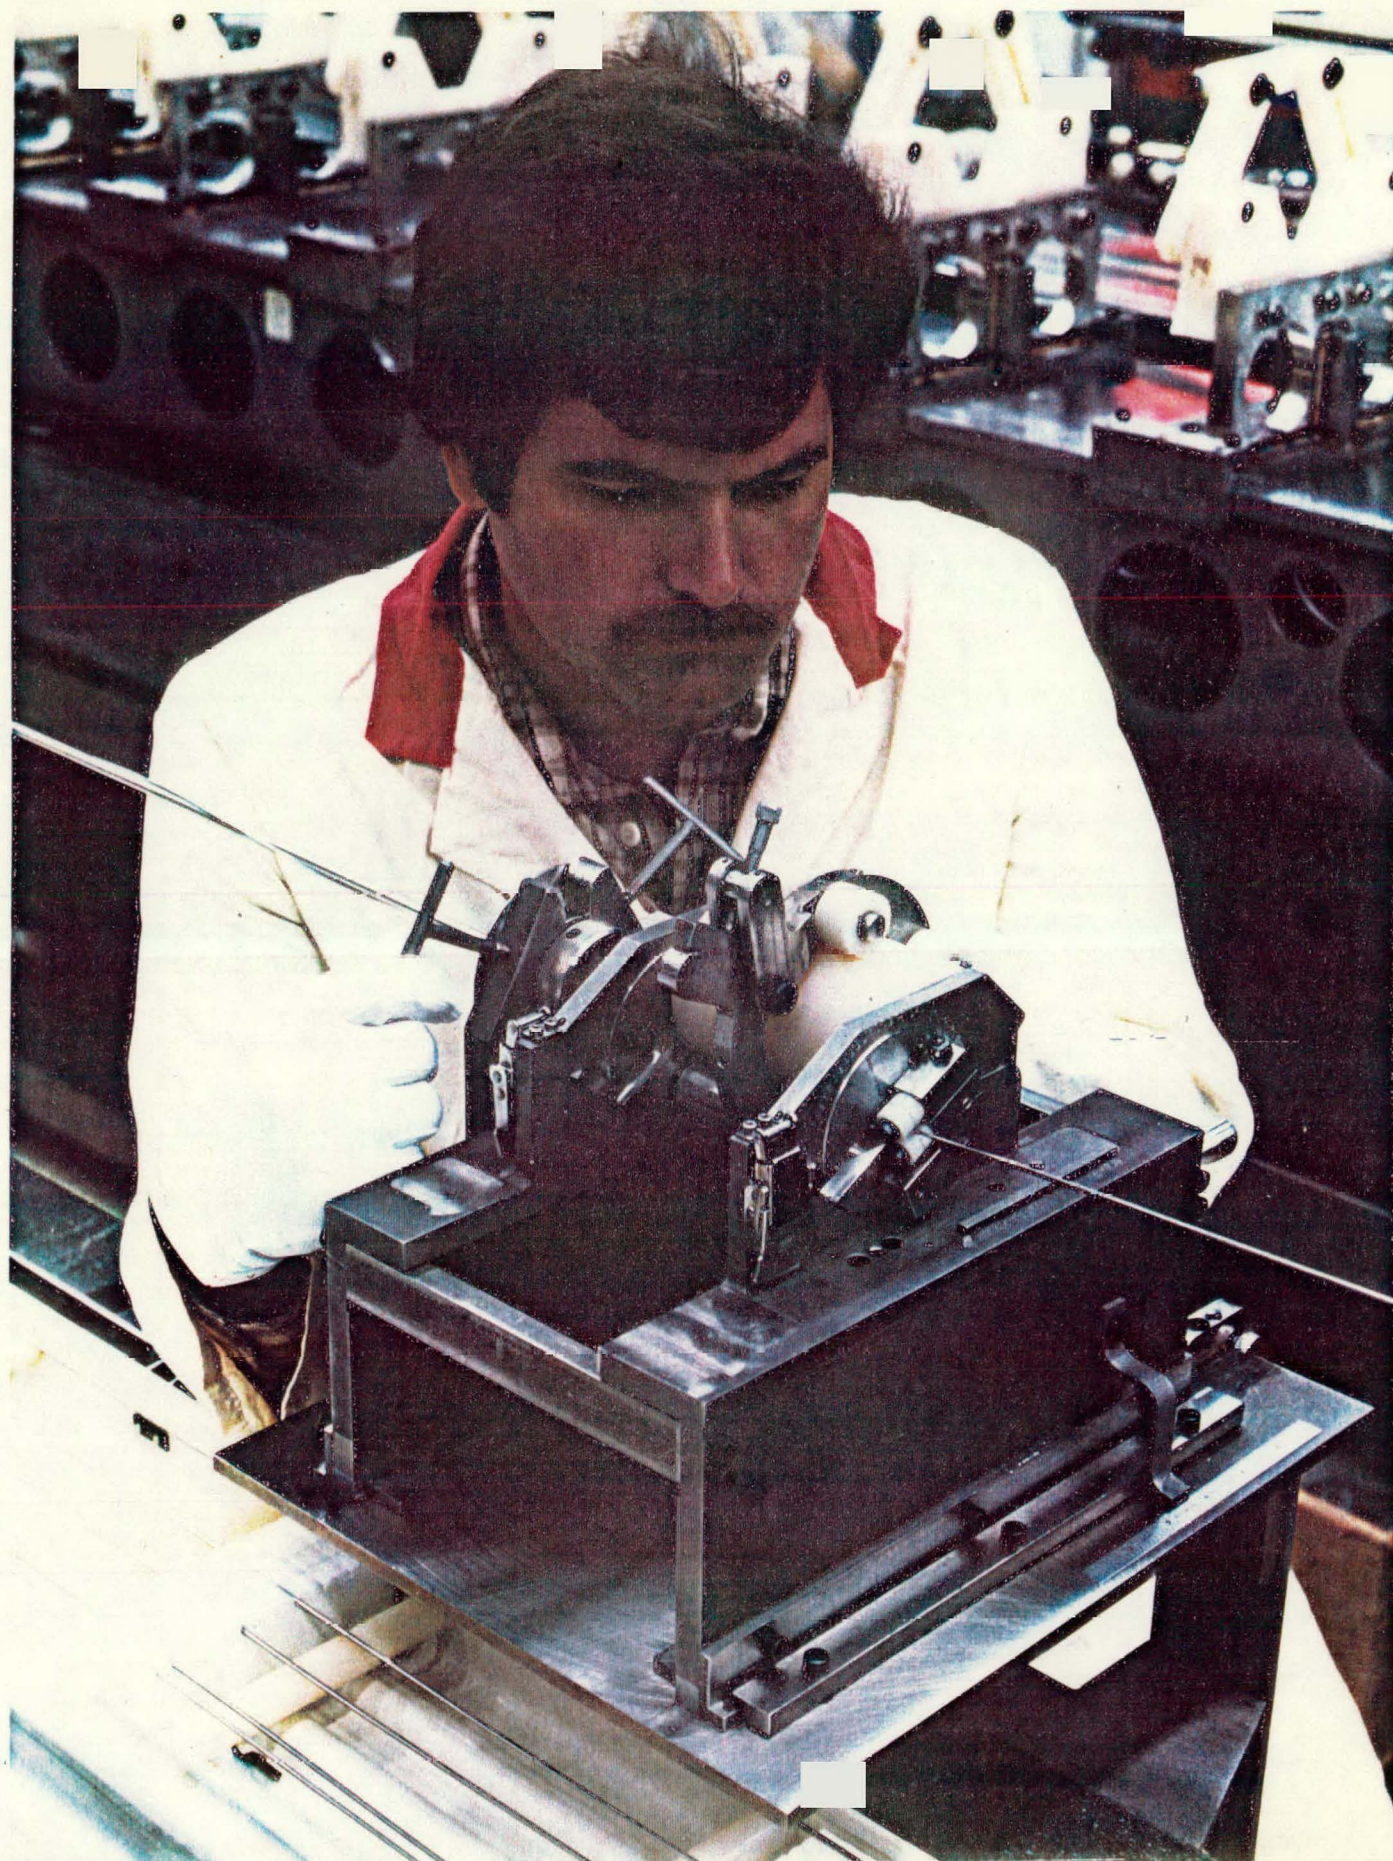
BEND FIXTURE SET UP FOR FINAL 3-DIMENSIONAL BEND
